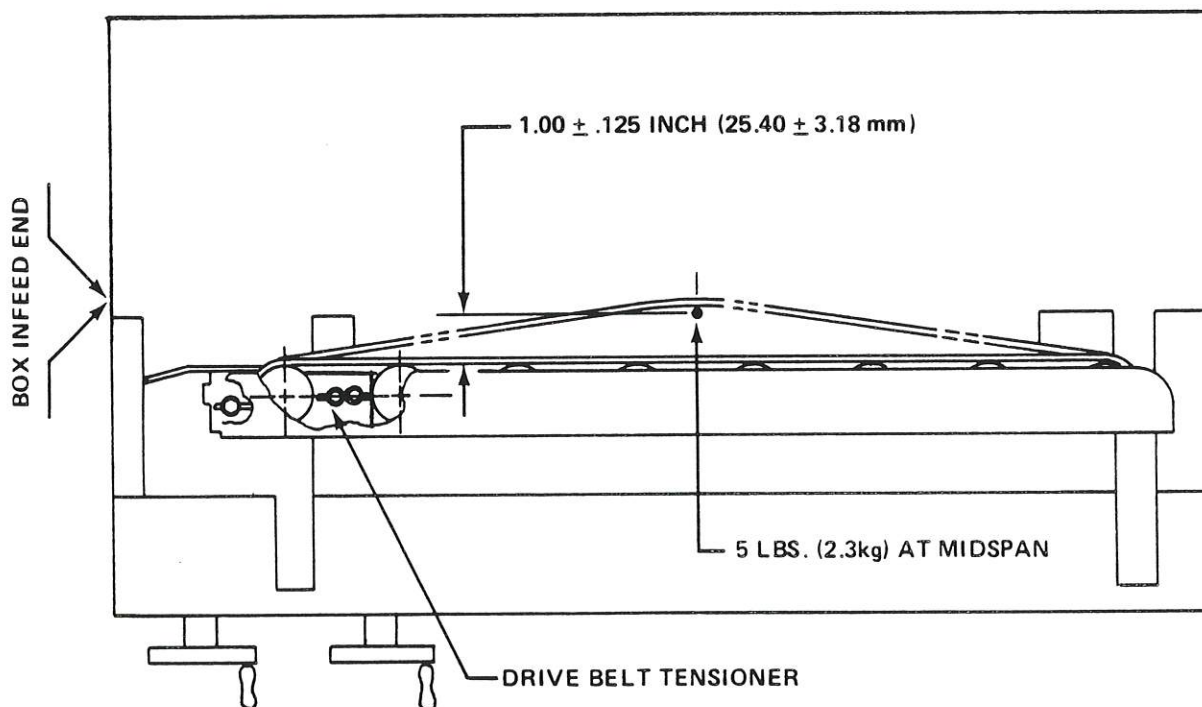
BOX DRIVE BELT TENSION - (TOP VIEW)
